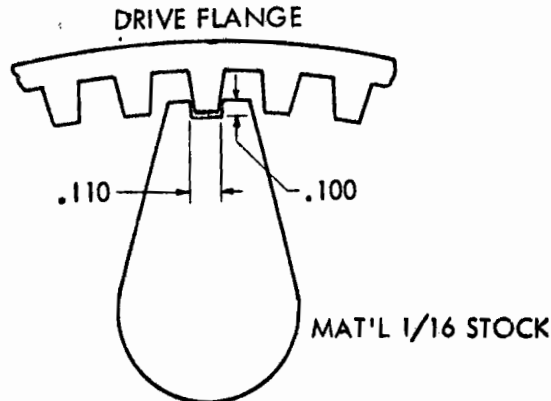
Gauge for Checking Disc Drive Tooth Wear
